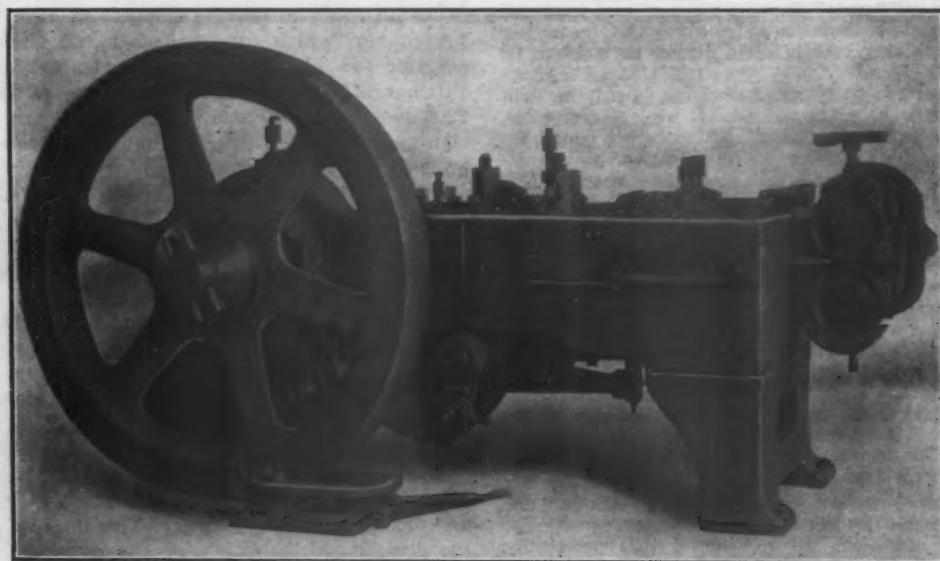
View of the Opposite Side of the No. 4 Double Stroke Header, Showing the New Foot Brake.
